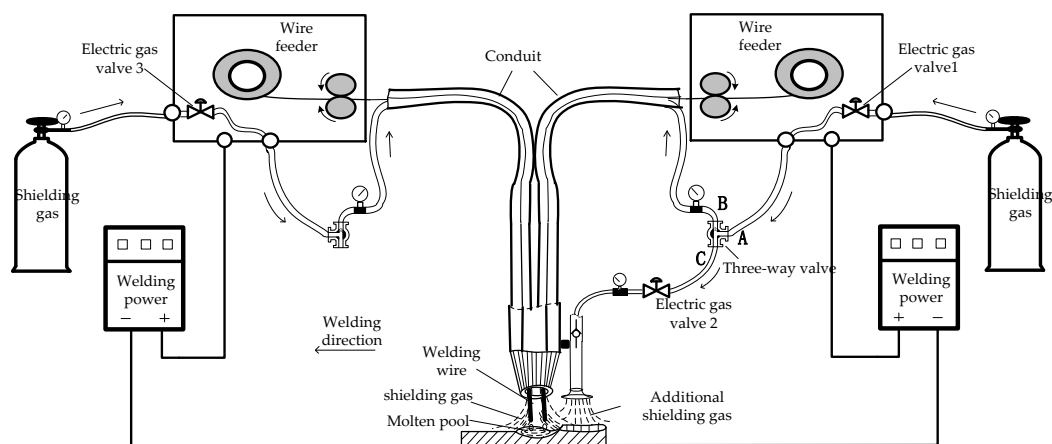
Schematic diagram of the twin wire pulsed MIG welding under additional shielding gas.
